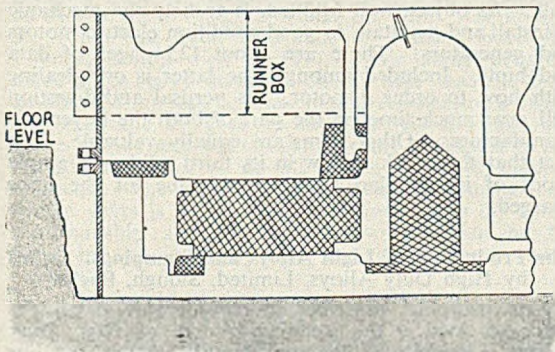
SECTIONAL VIEW OF THE MOULD READY FOR CASTING WITH BRONZE.
